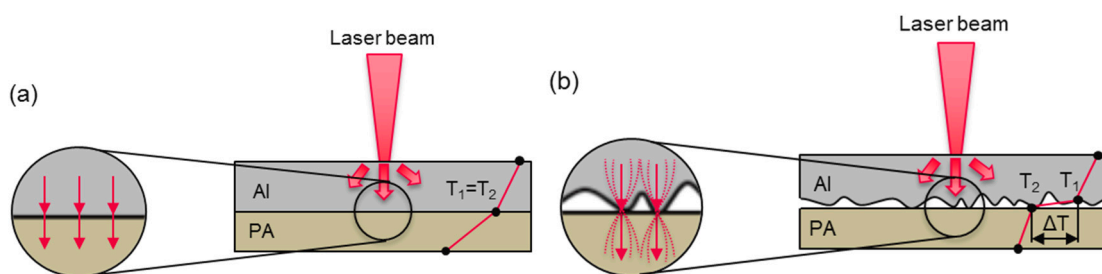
Schematic of hypothesized interfacial thermal-energy transfer during laser-welding process across (a) ideally flat conforming surfaces and (b) ablated aluminum surfaces in contact with smooth polyamide.
